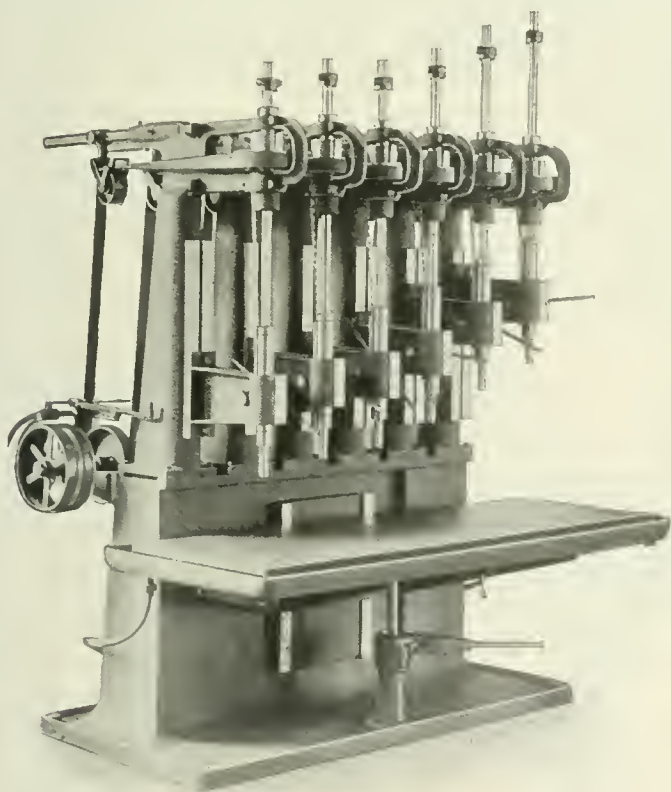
Henry & Wright Six-spindle Drilling Machine
